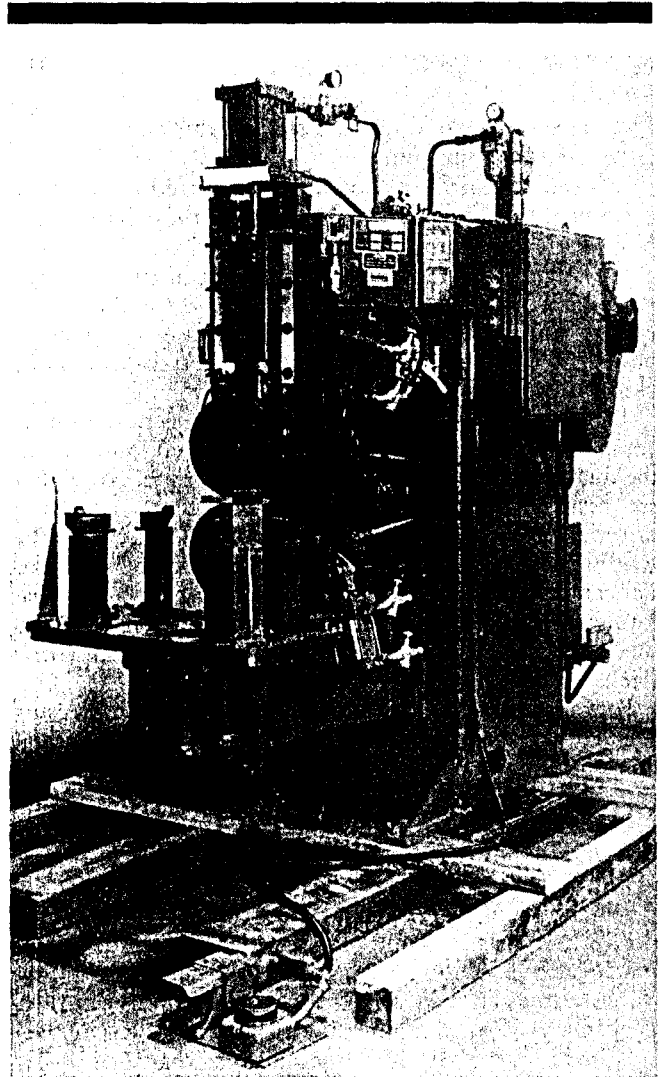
A Standard Circular Seam Welding Machine with a Special Fixture
